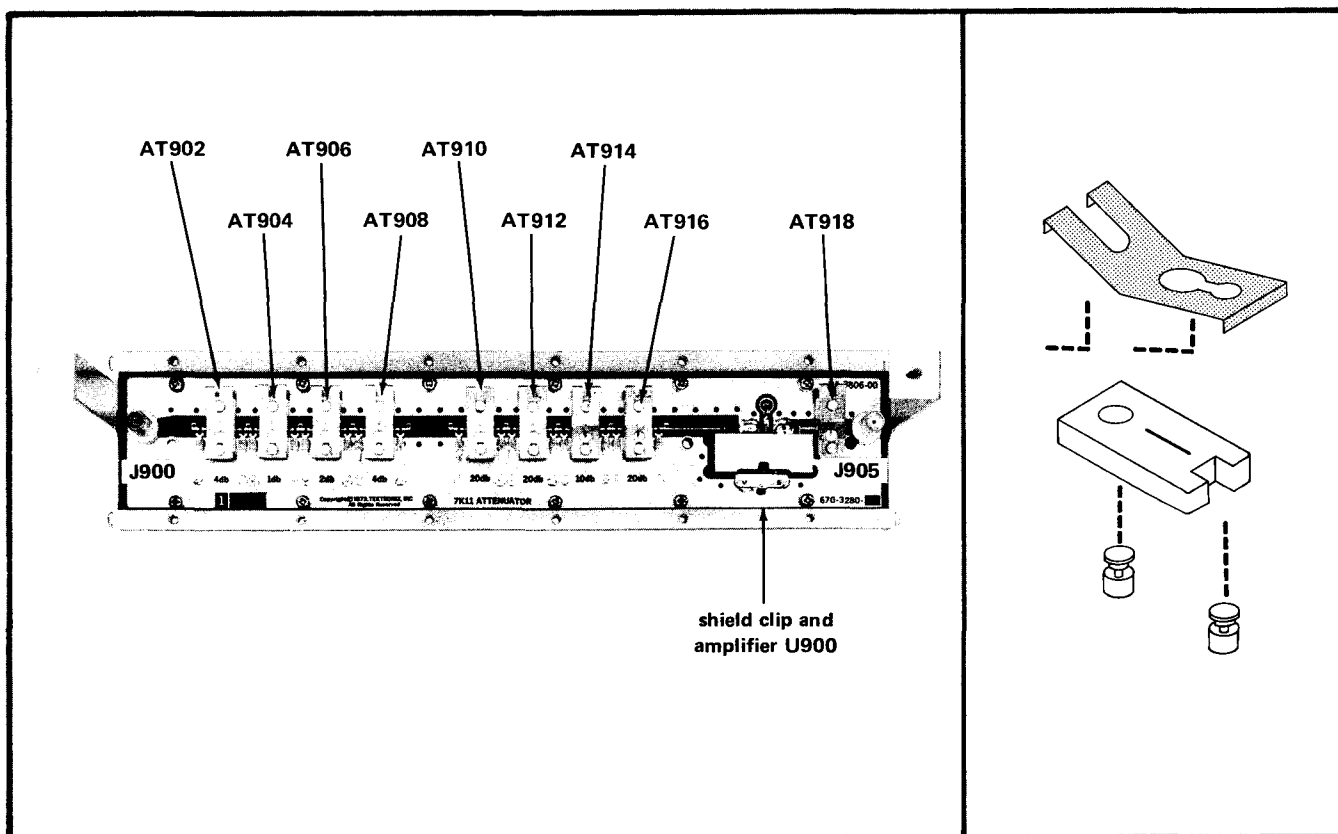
Illustration showing the location and mounting of the attenuator chips on the circuit board.
